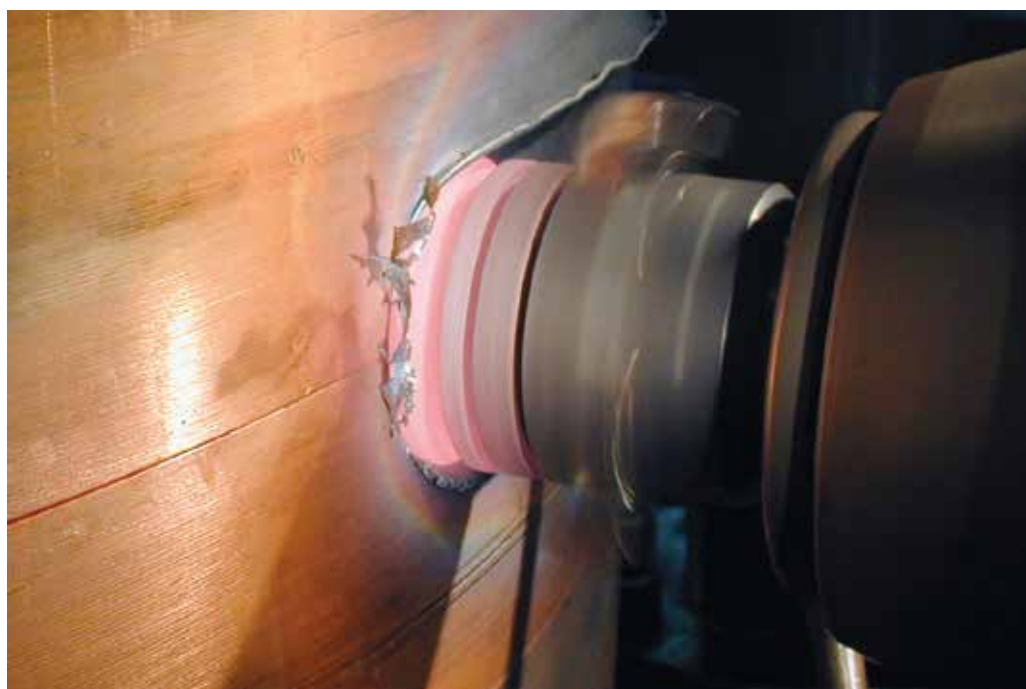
Friction stir welding at the Canister Laboratory.
